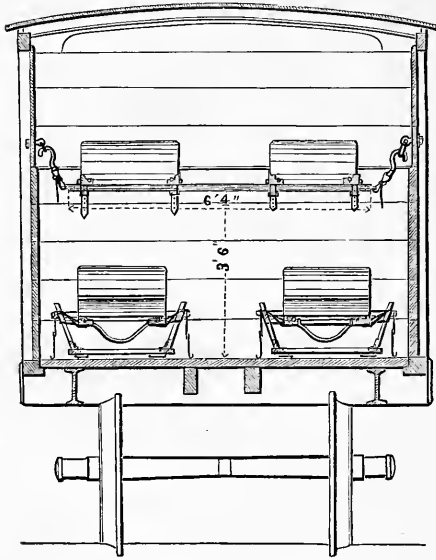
Transverse section of a baggage-car arranged on the Baden plan. [After GURLT.]
